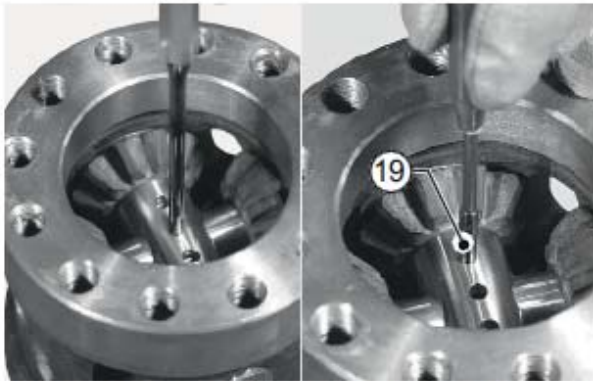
Bring the pin holes in line with the help of a pin driver.
